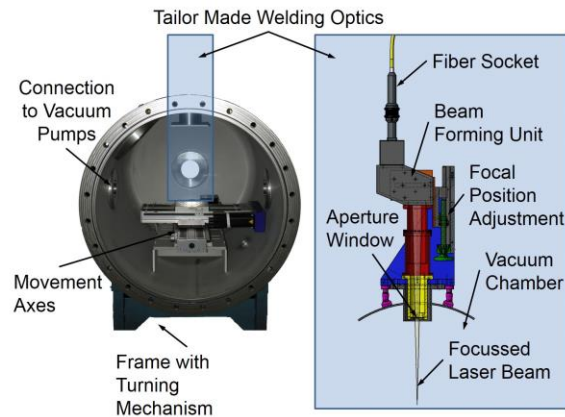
Welding chamber setup for laser beam welding in thick plate application
